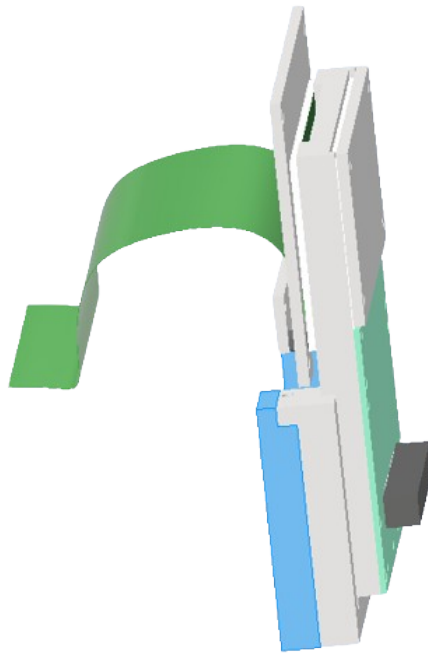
The new modular design. The blue coloured part is fixed to the outer shielding, while the remaining parts can be fixed on top of it. The green flex-PCB is connected with a plug to the ROB.
